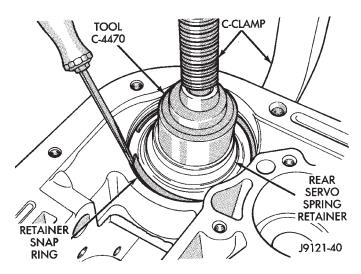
Installing Rear Servo Snap Ring—46RH overdrive piston retainer. Center hole in gasket is smaller than retainer and cannot be installed over retainer.
